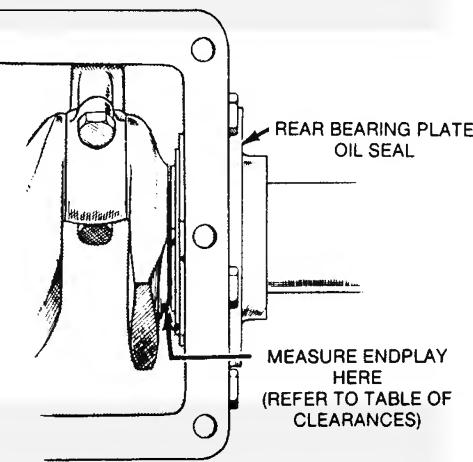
MEASURING CRANKSHAFT ENDPLAY
